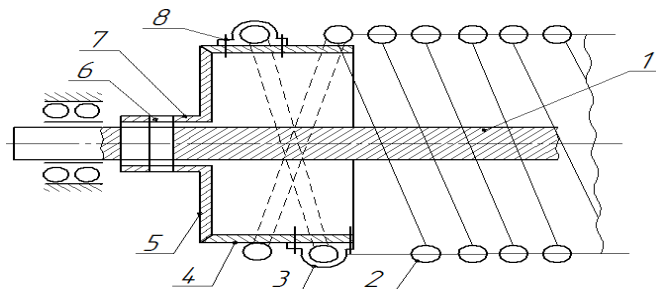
Arrangement of node A: 1-shaft; 2-spring; 3-bracket; 4-cup; 5-disk; 6-pin; 7-bushing; 8-bolts tightening the wire bracket to the cup.
